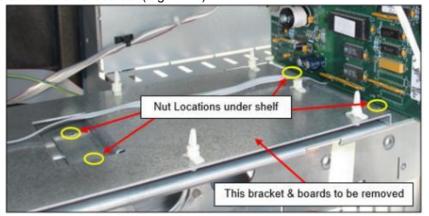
Location of nuts under shelf (Regulator board not shown for clarity)
